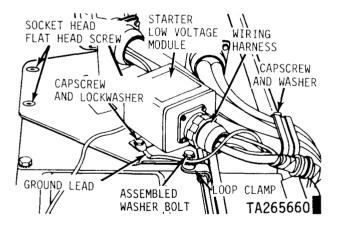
Removing or installing wiring harness mounting bmcket, late engines.
